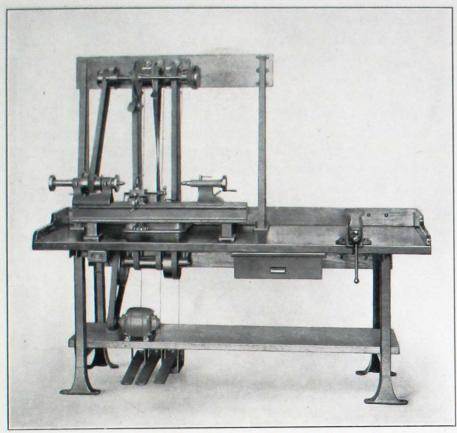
Lathe on Unit Bench with Individual Motor Drive.
